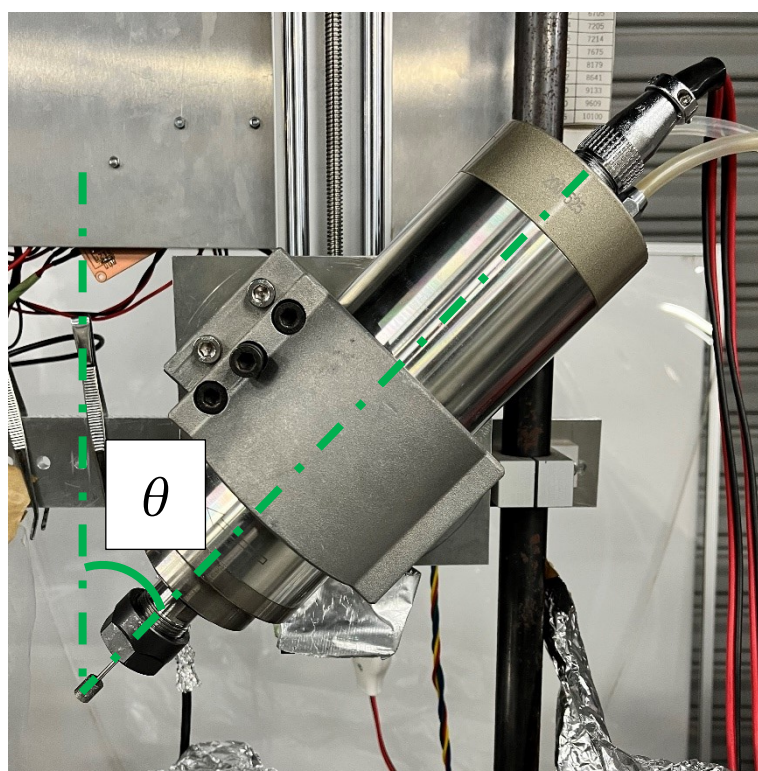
Angle of grinding tool ($\theta = 45^\circ$)
